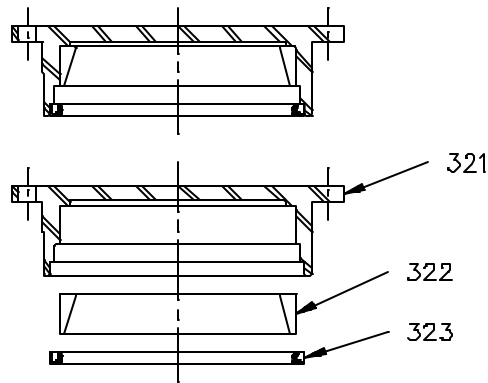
Upper Pinion Shaft Bearing Cap Assembly [320]
